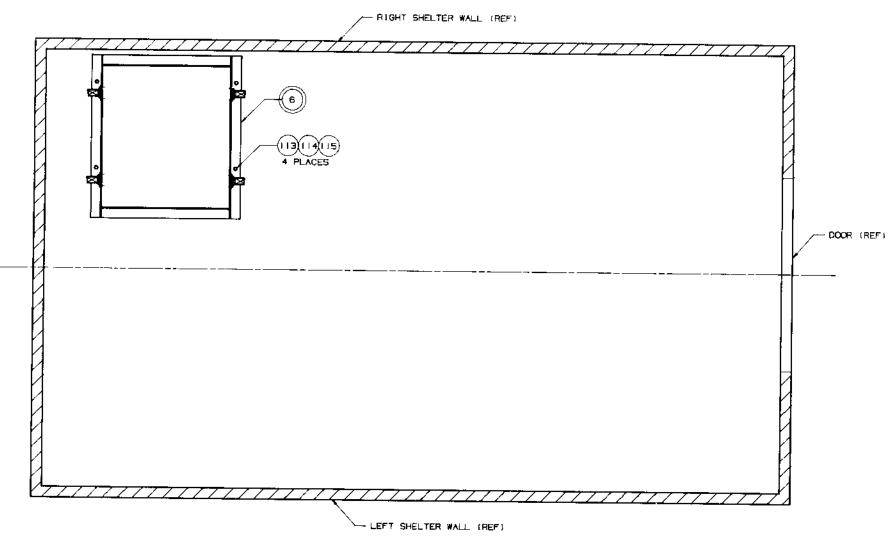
Shelter, S 280 Modification of (Sheet 12 of 18) D-41/(D-42 blank)
